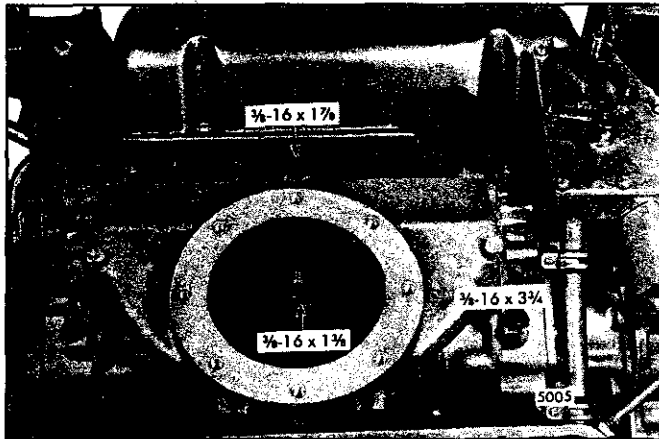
Location of Air Shutdown Housing Mounting Bolts (6V Engines)
